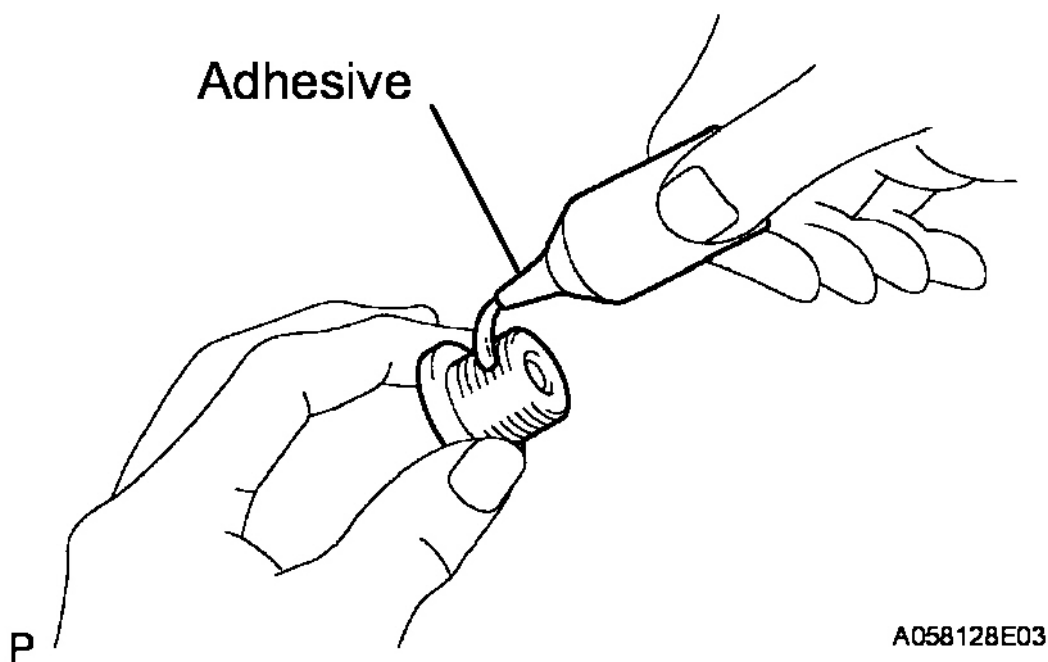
Applying Seal Packing To Threads Of Screw Plug End
